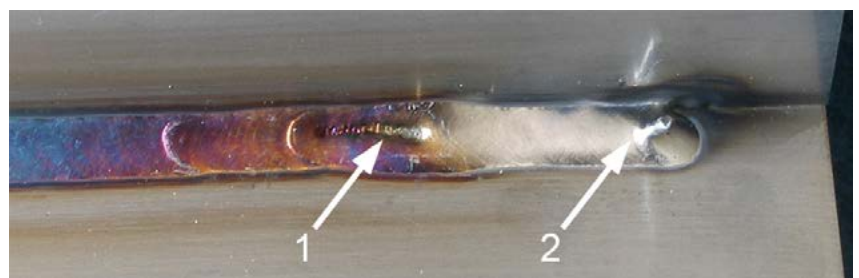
Weld end during disturbances of steady filler metal wire feeding – visible scratch due to the immersing of the wire in the weld metal pool (1) and the wire adhesion at the weld end (2)
